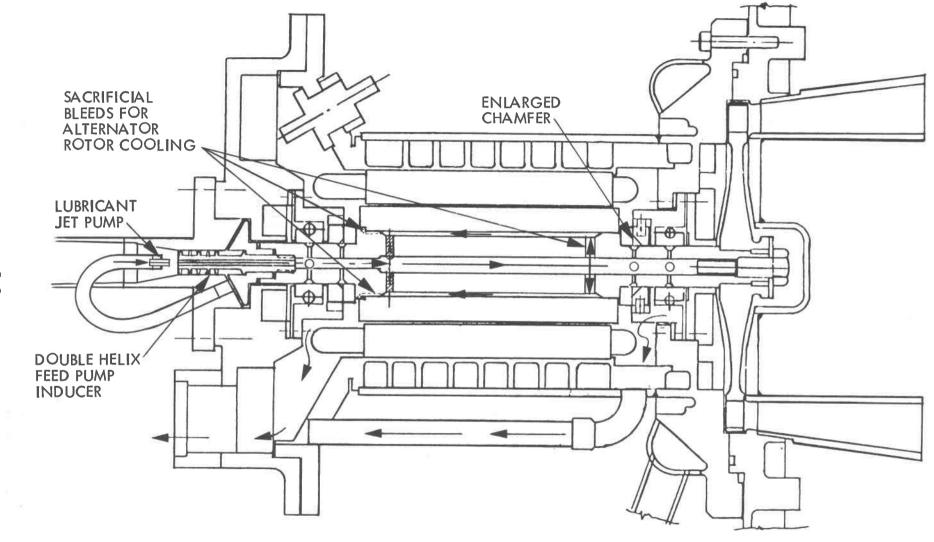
Shaft with Straight-Through Center Line Lubrication Channel (TAP Build 11)
